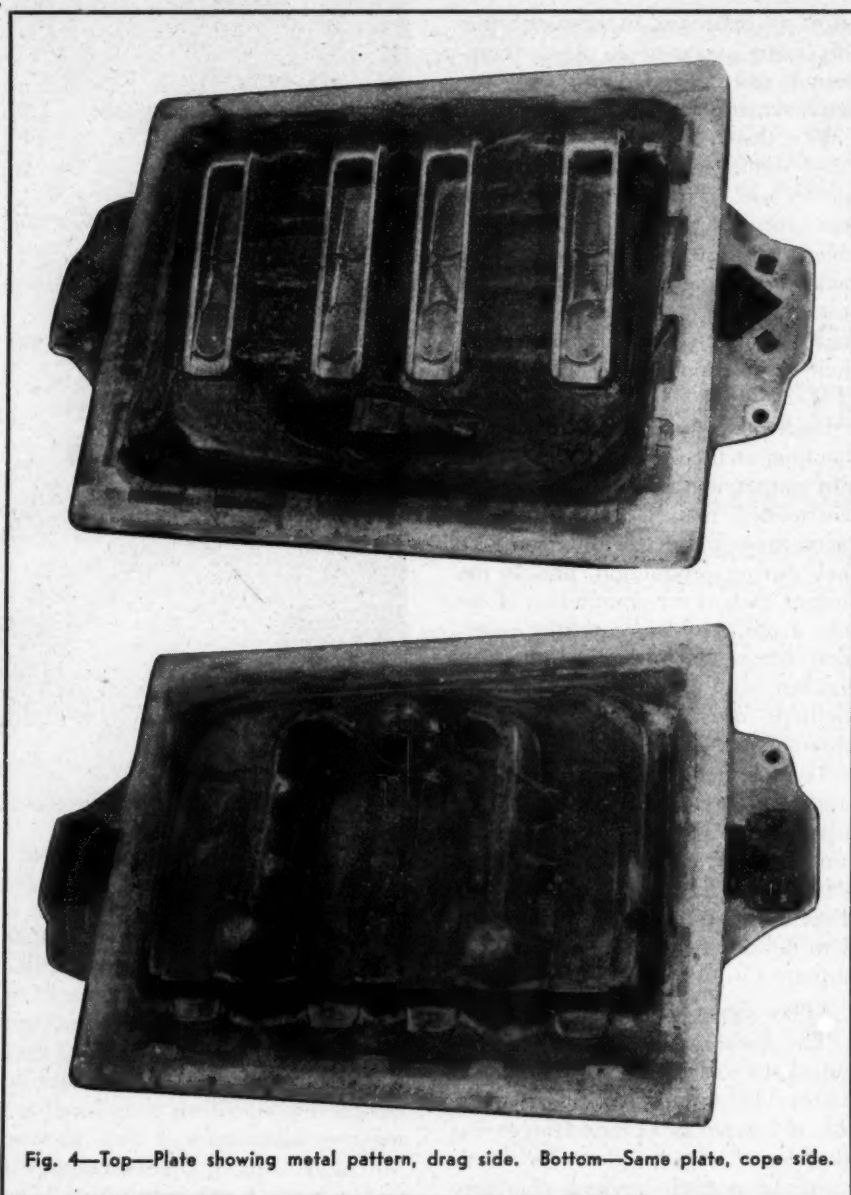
Top—Plate showing metal pattern, drag side. Bottom—Same plate, cope side.
